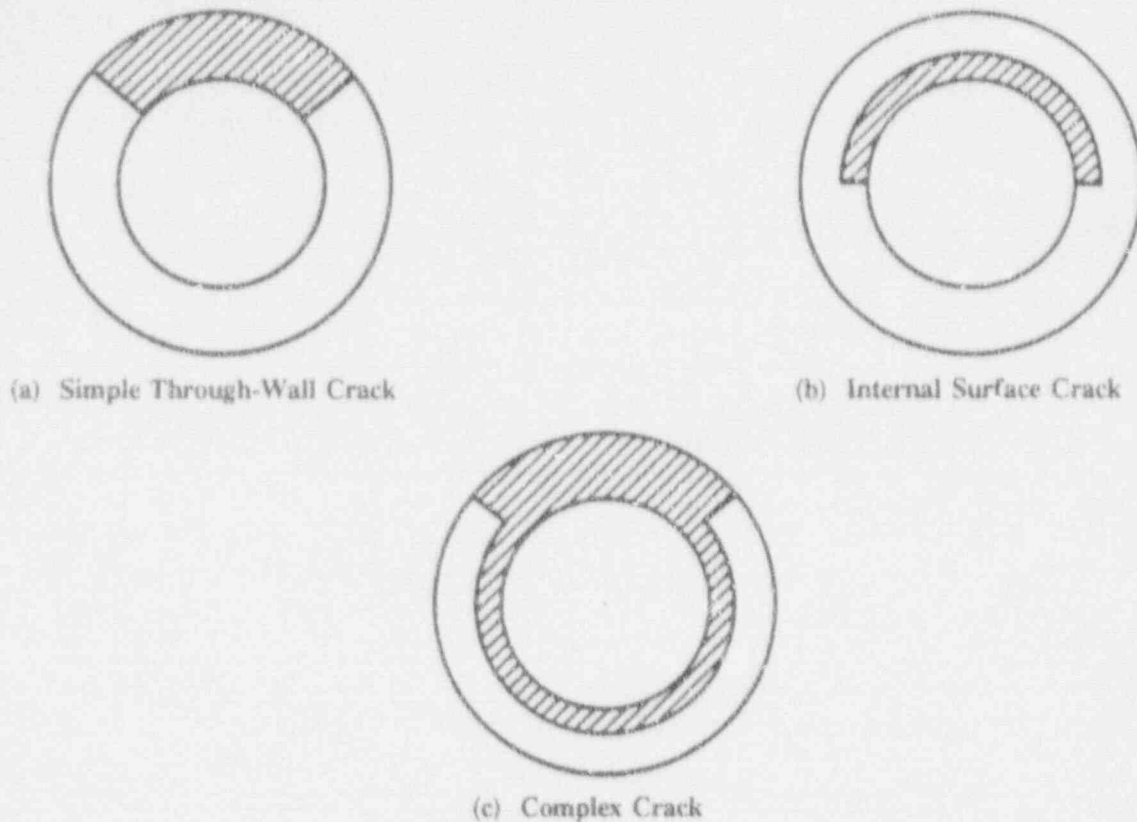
Typical crack geometries in piping and piping welds
